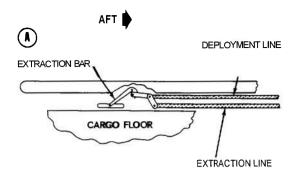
EXTRACTION BAR ASSEMBLY
